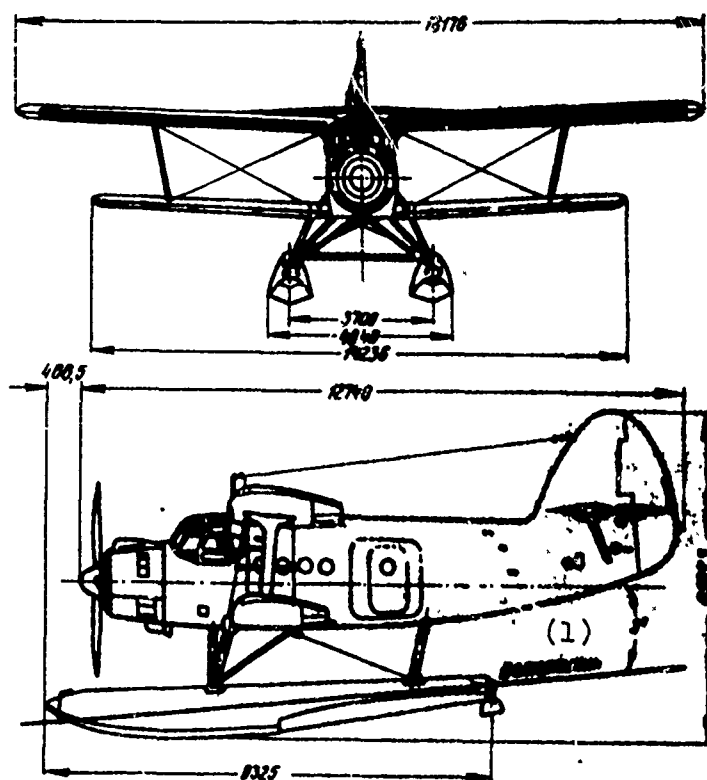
Geometric dimensions of the AN-2V aircraft.
